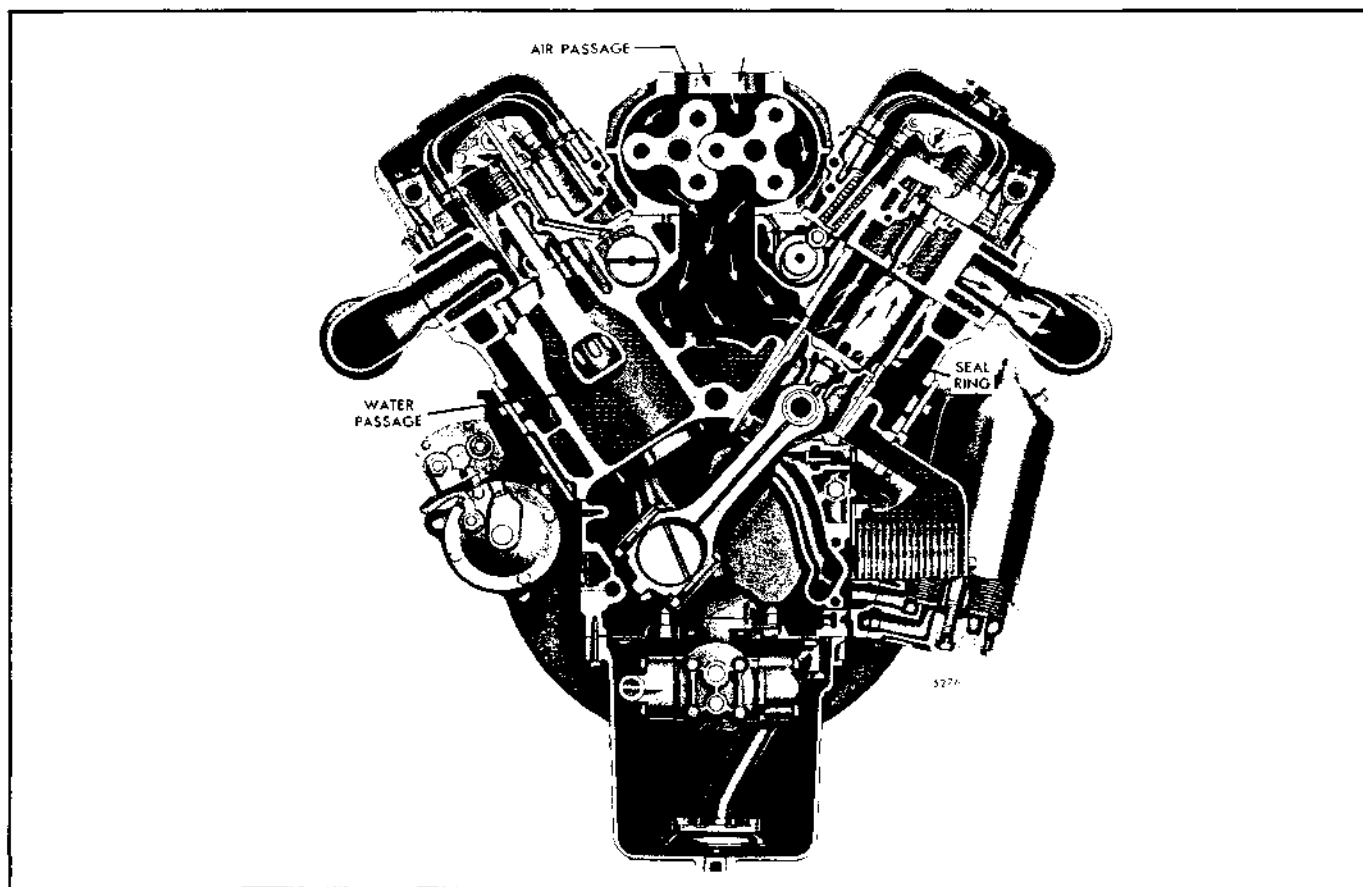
Air and Water Passages in 8V Cylinder Block
